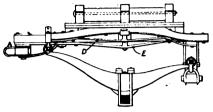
SHOWING A SIDE VIEW OF THE FRONT TRUCK
